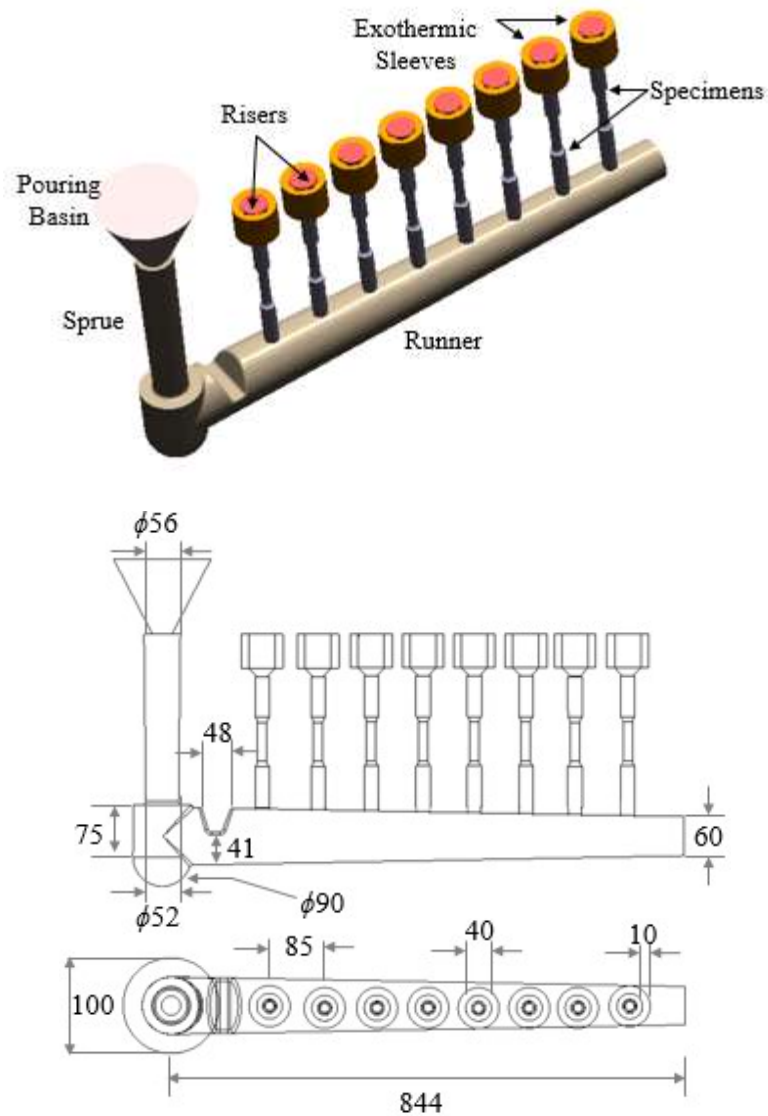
Optimized casting layout for fatigue specimens of steel
